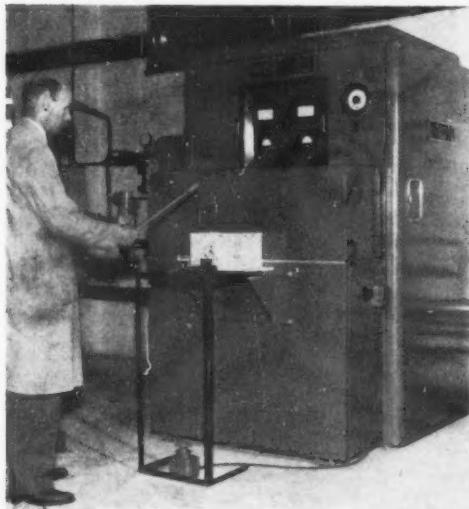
The Wild-Barfield induction heating furnace installed at the works of the Sandiacre Screw Co. for heating stainless-steel bolt billets prior to a hot-forging operation. A $\frac{1}{2}$ -in. diameter billet is heated to 1,150 deg. C. in 8 sec.
